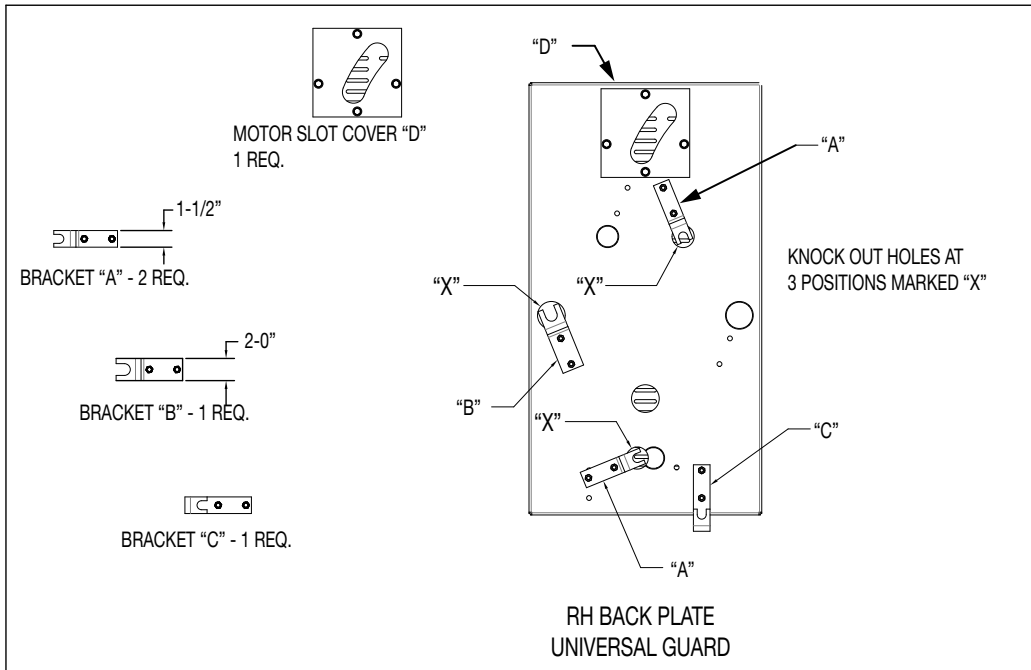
Right Hand Back Plate for Universal Belt Guard
